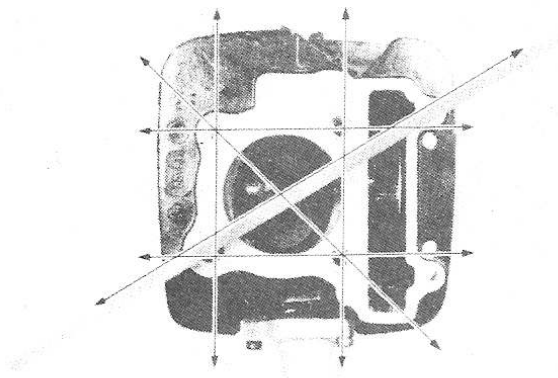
B.12 Lay the straightedge from corner-to-corner and diagonally when checking the head for warpage (Sec 9)
